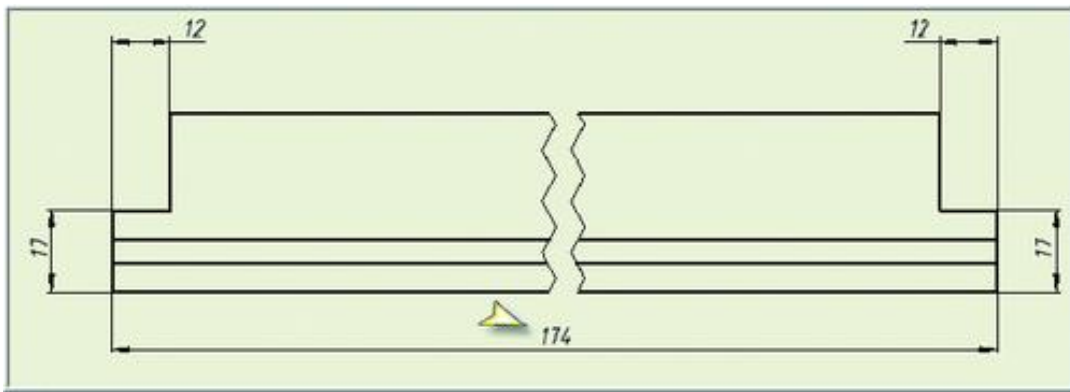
The associative drawing of the bolt in the library assembly reflects the length of the part until the connection between the local frame of the assembly and the main frame is established
